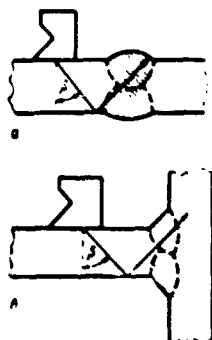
Inspection of a welded seam. a) By a singly-reflected ray in the case of a welded butt joint; b) by a singly reflected ray in the case of a T joint.
